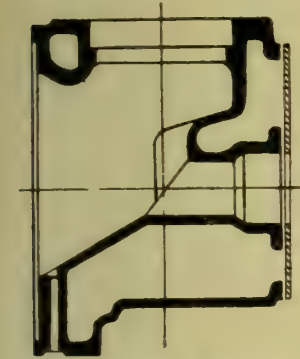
PRESENT DESIGN OF CYLINDERS AND HEADS.
